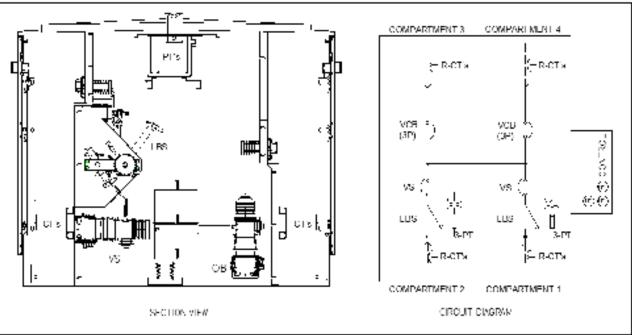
Preliminary Layout - Section View (Subject to Final Engineering)
